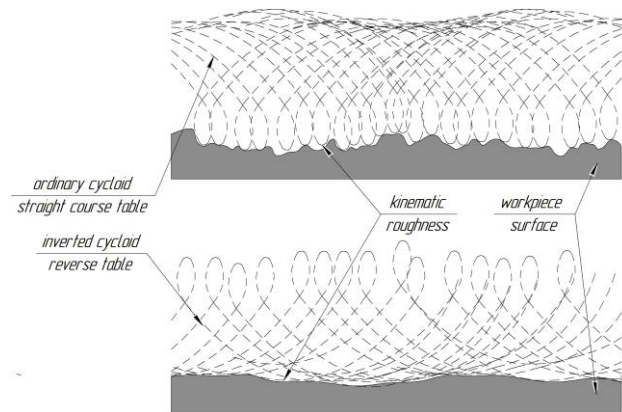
Trajectory of movement of the tool during the friction hardening when there is direct and reverse the course of table machine
